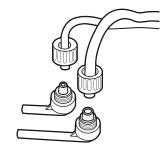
Placing Fitting Nuts Over Tube Ends
